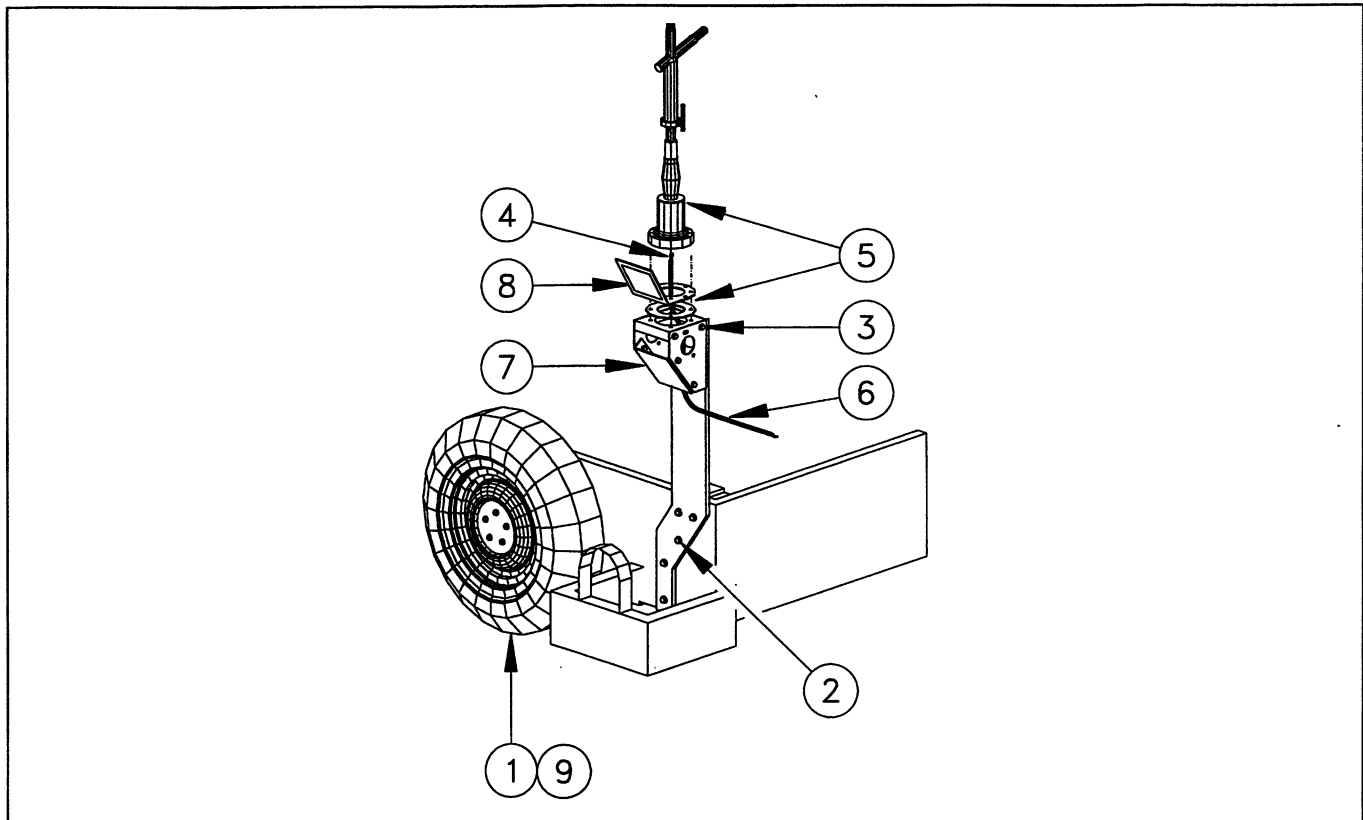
(Sheet 1 of 2) Antenna Cable Assembly
